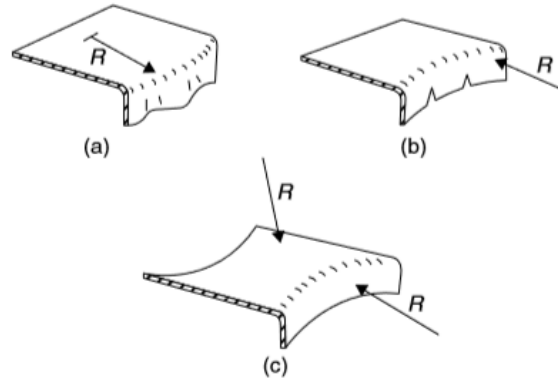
(a) A shrink flange showing possible buckling. (b) A stretch flange with edge cracking. (c) Flanging a curved sheet [4]
